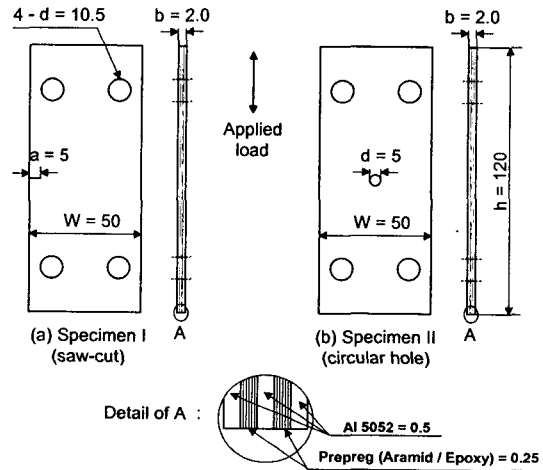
Geometries of FRMLs containing (a) saw-cut specimen and (b) circular hole specimen (unit : mm)
